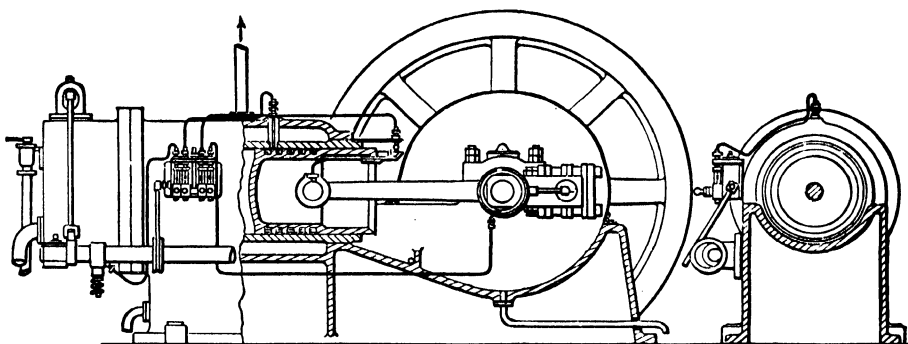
Timed oil injection to piston of gas engine by a mechanical lubricator.
